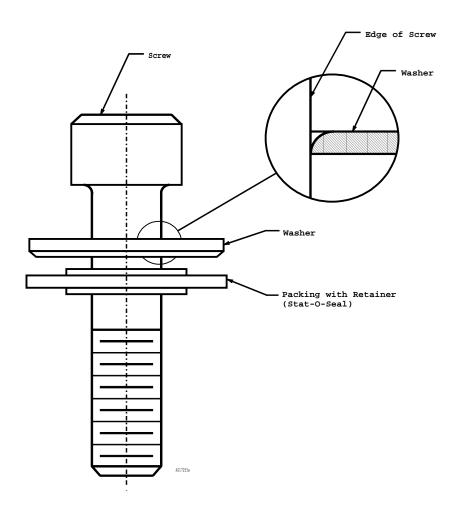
Packing with Retainer, Washer, and Screw Assembly
